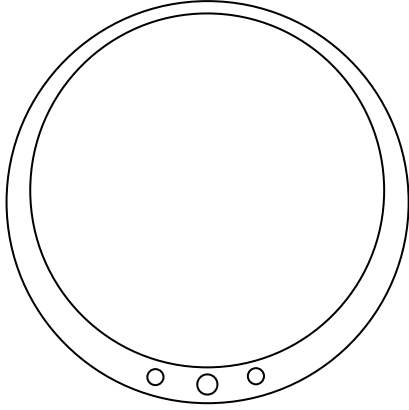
Orientation of the part in CMM machine for measuring the dimensions of the circular hole.
